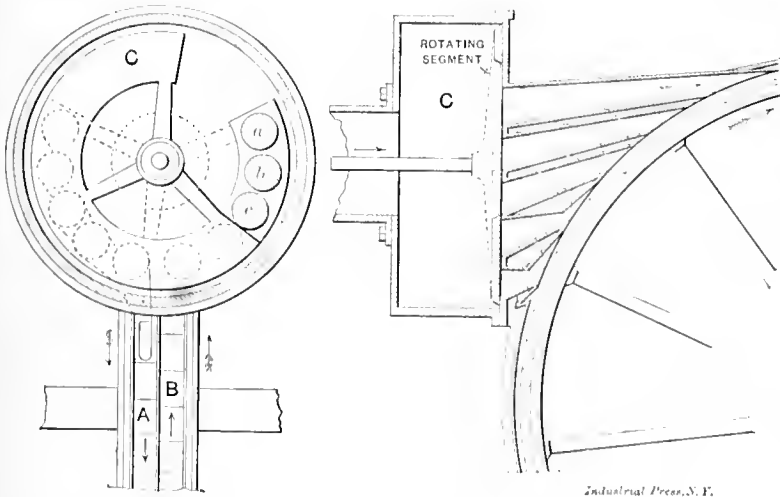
Pilbrow's Reversing with Valve for Controlling Nozzles
